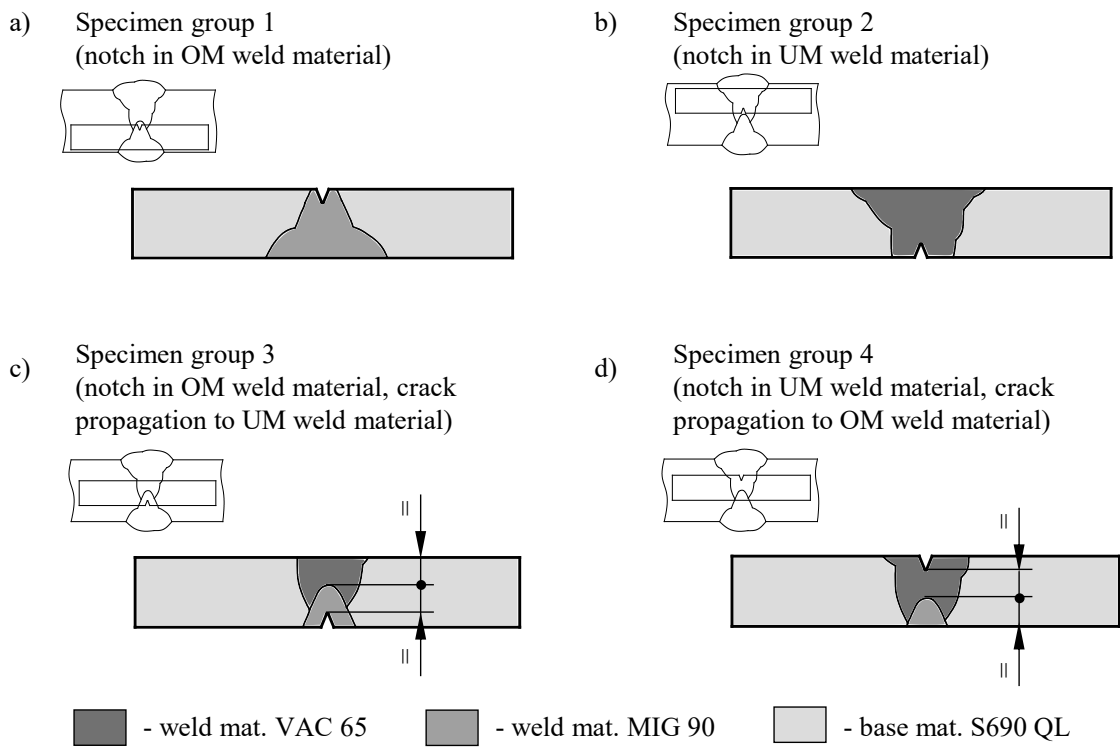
The configurations of the notched Charpy specimens that were extracted from a) the OM weld material, b) the UM weld material, c) the weld root with notch located in the OM weld material and d) the weld root with notch located in the UM weld material.
